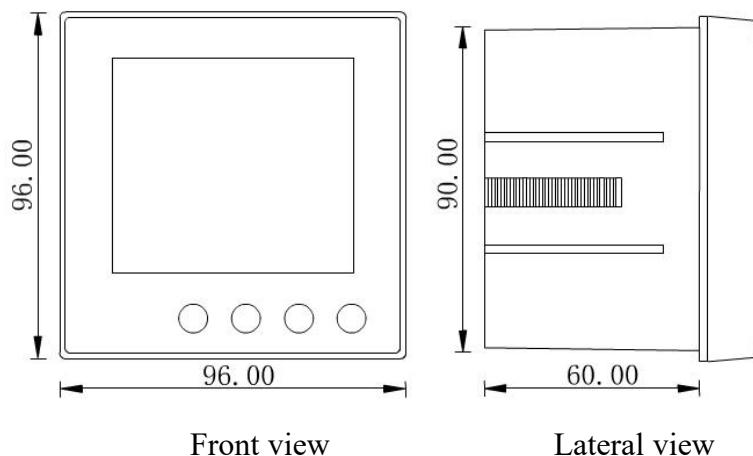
EM600 Device size Figure (Unit: mm)
